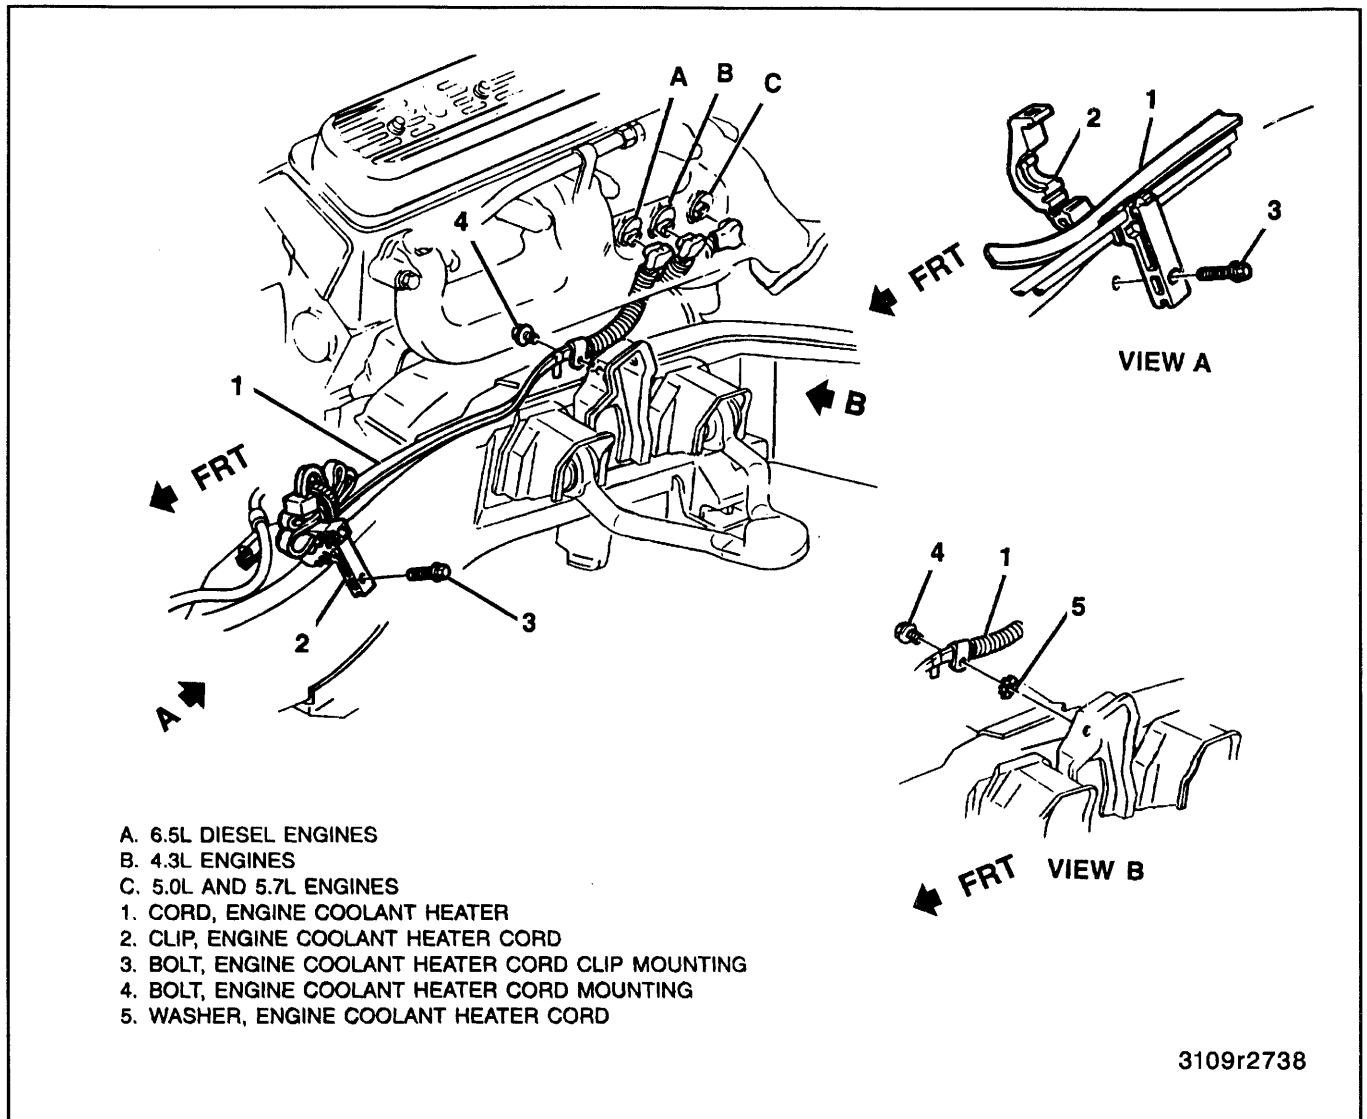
Engine Coolant Heater Cord Routing (Four-Wheel Drive Models)
